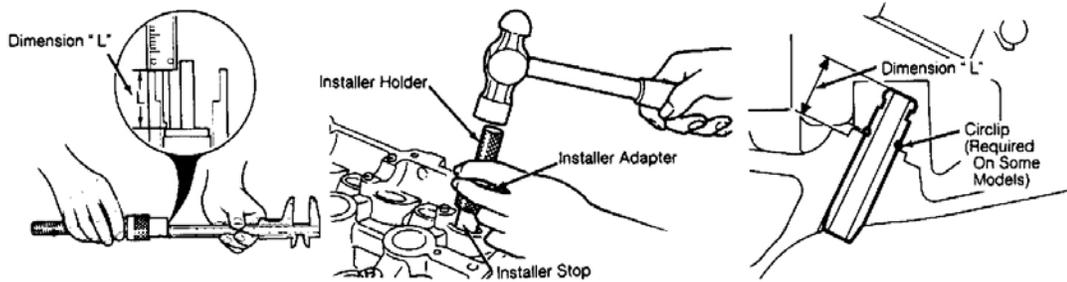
Adjusting Valve Guide Installer & Installing Guide
